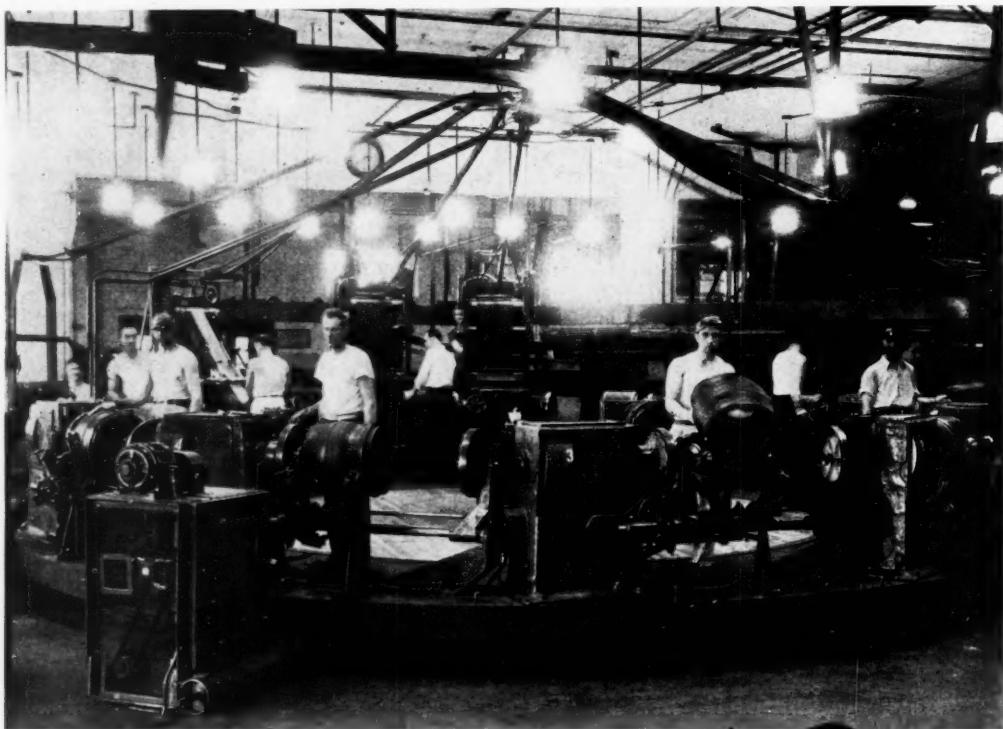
View of "Merry-Go-Round" Showing in Front the Start and the Finish of the Assembly-Line Operations
